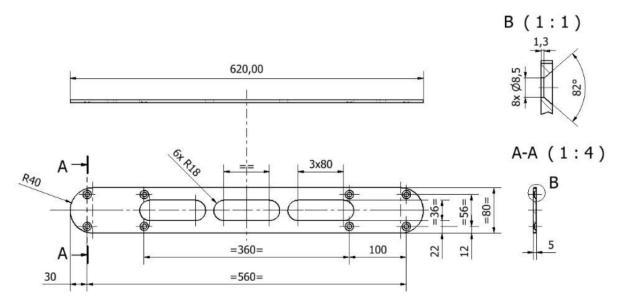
LSP3A Clear Pedestal Base Fixing Plate Dimensions
